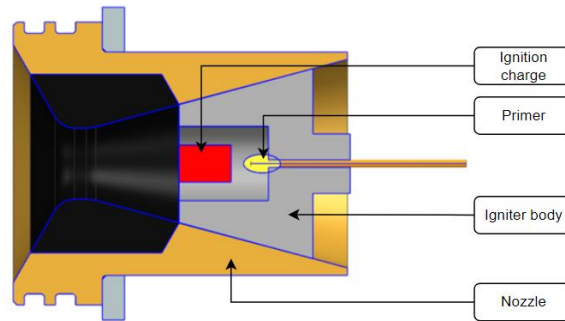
Cross sectional view of the A2 motor igniter first iteration assembly inside nozzle
